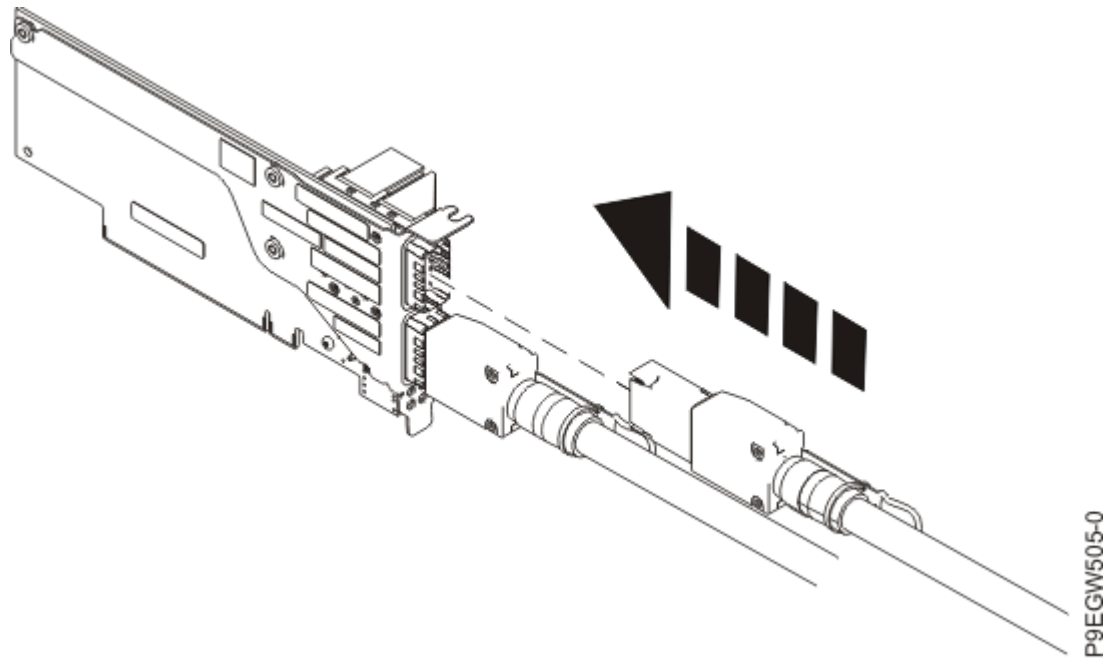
Connecting the expansion drawer cable to the cable adapter on the host system
